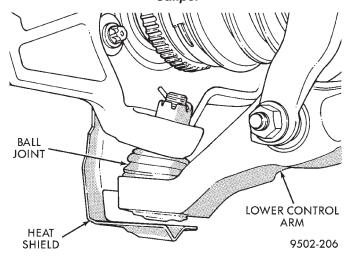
Ball Joint Heat Shield With 15 Inch Wheels
